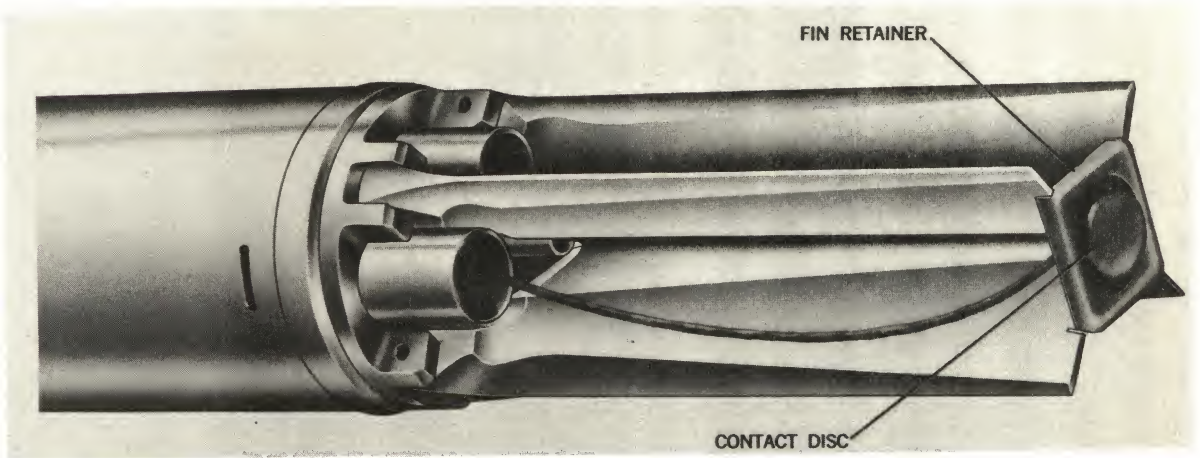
Nozzle-Fin Assembly, Fins Closed.
